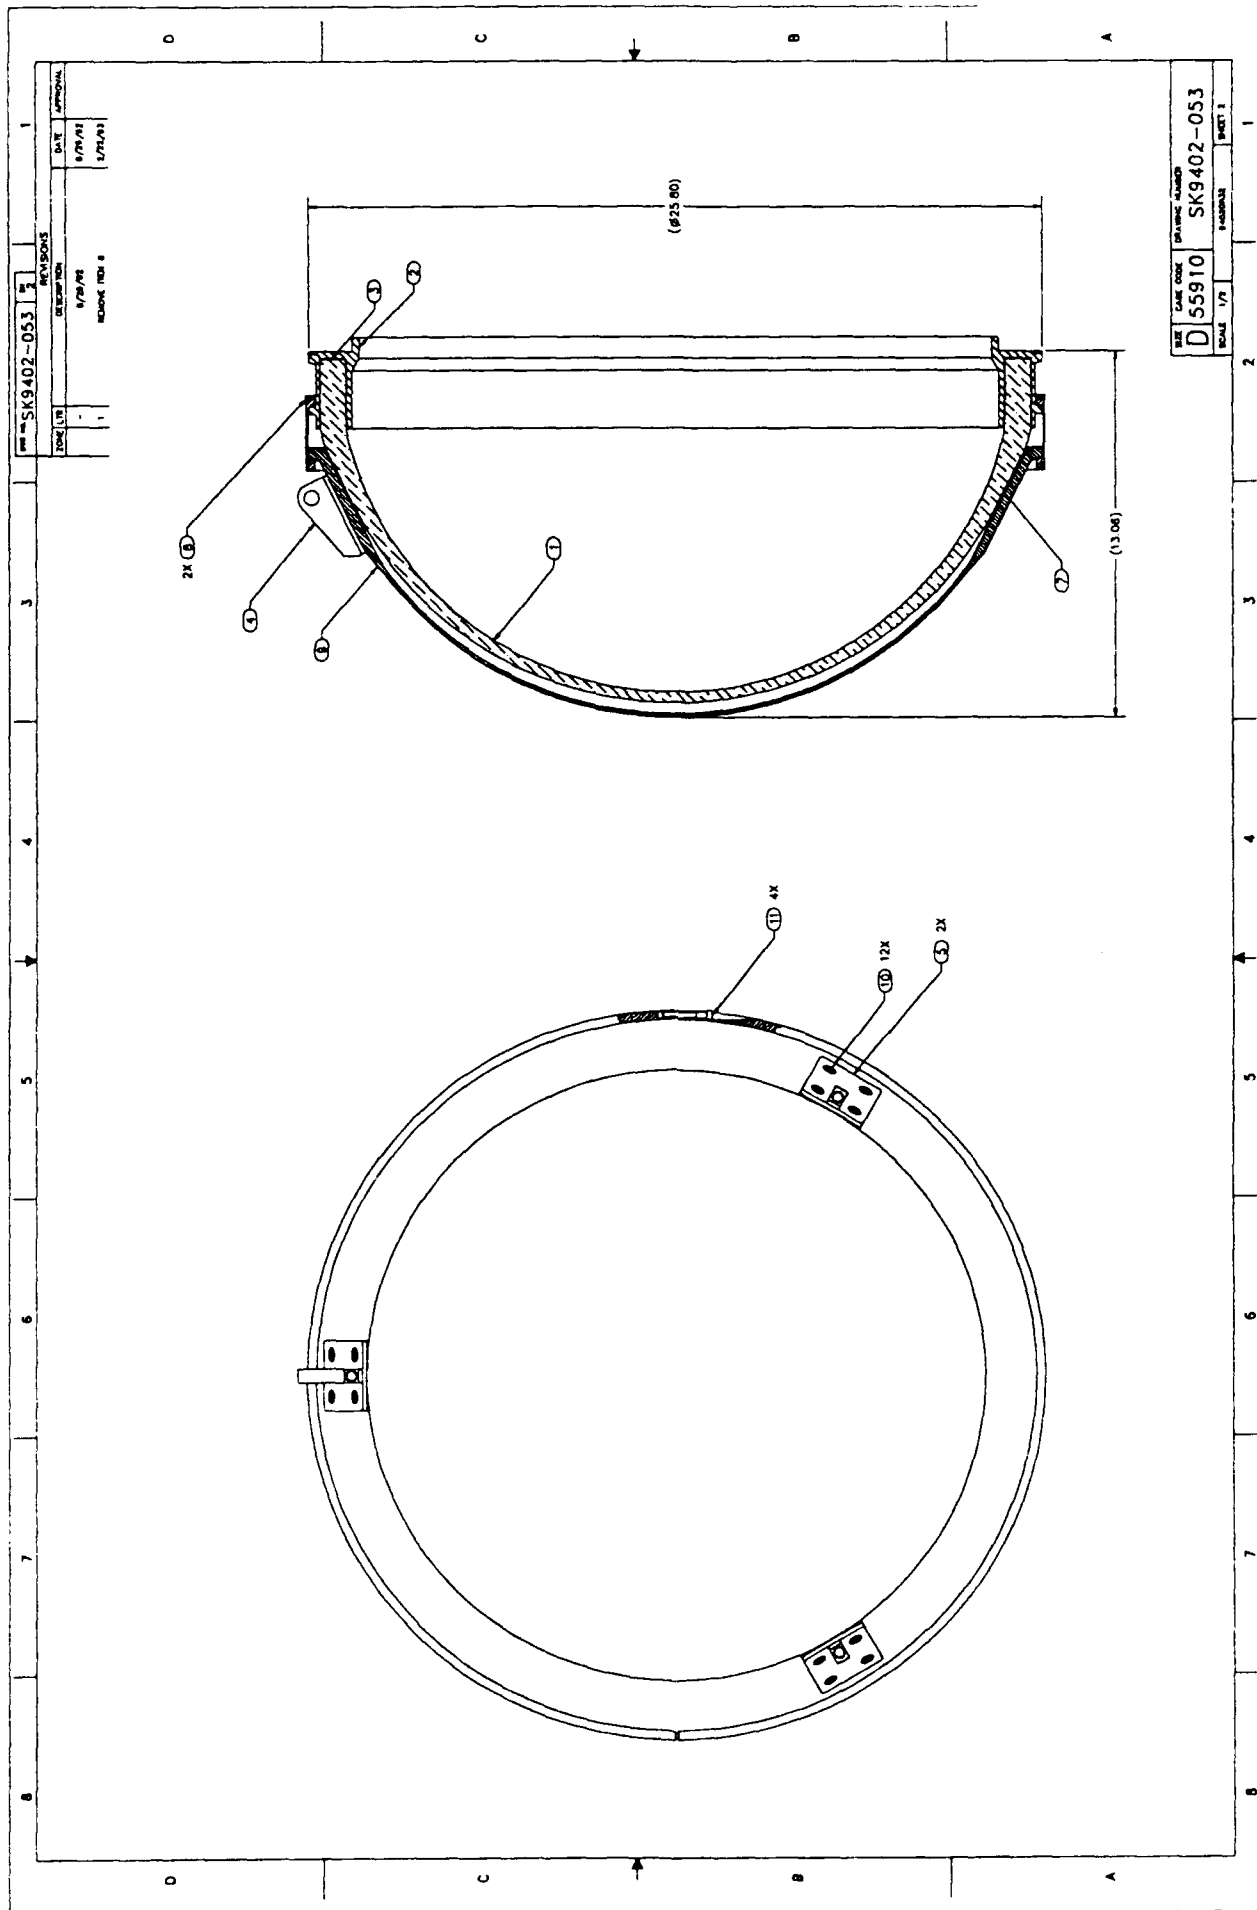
26-inch-housing aft head assembly, sheet 2.
